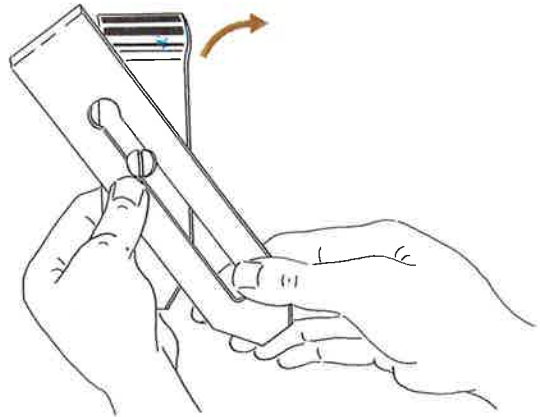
Assembling the plane-iron cap and plane iron.
